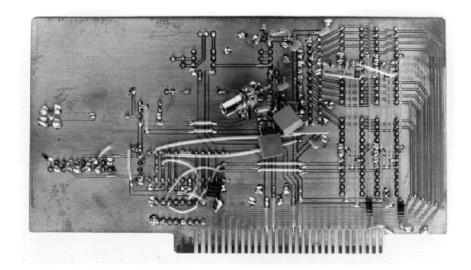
A Milled Circuit Construction Prototype Board (Bottom View)
